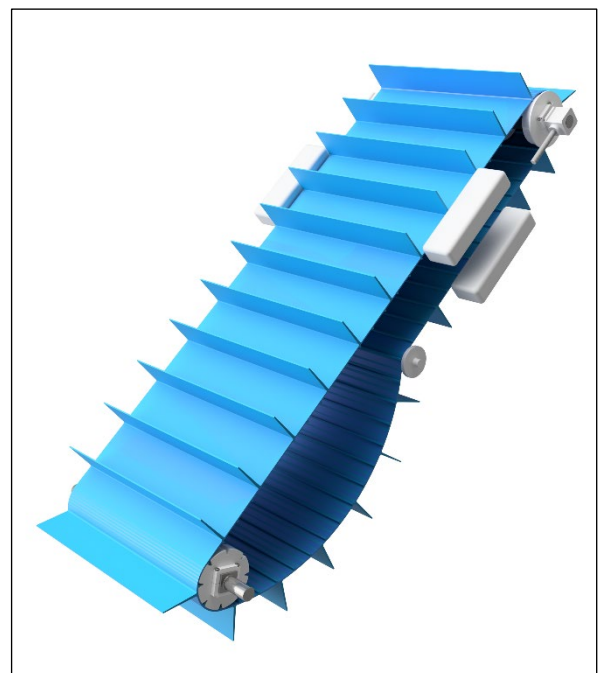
INCLINED STRAIGHT CONVEYOR
